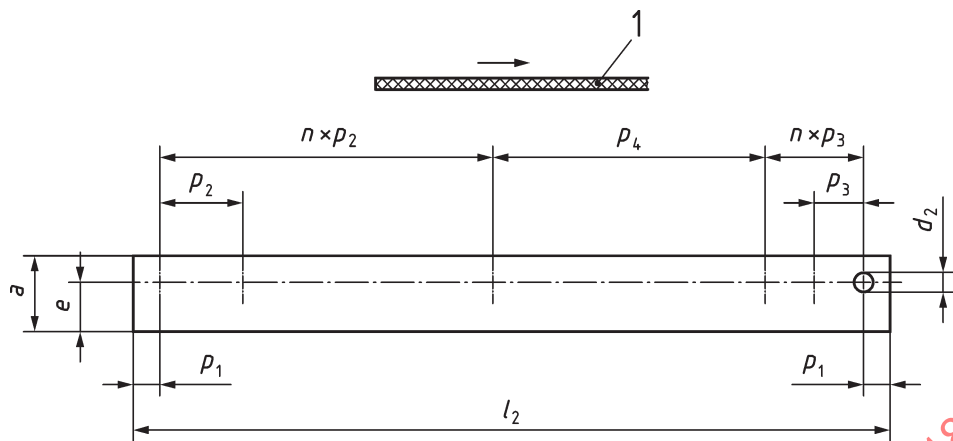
Power operated coupling device — main dimensions (the figure shows a right-hand model)
